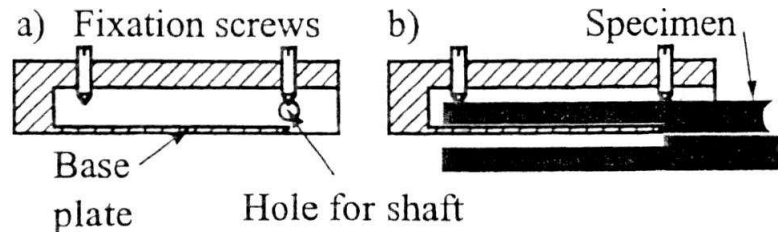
Section view of the fastener box (a) without and (b) with mounted specimen (Brandt, 1998)
